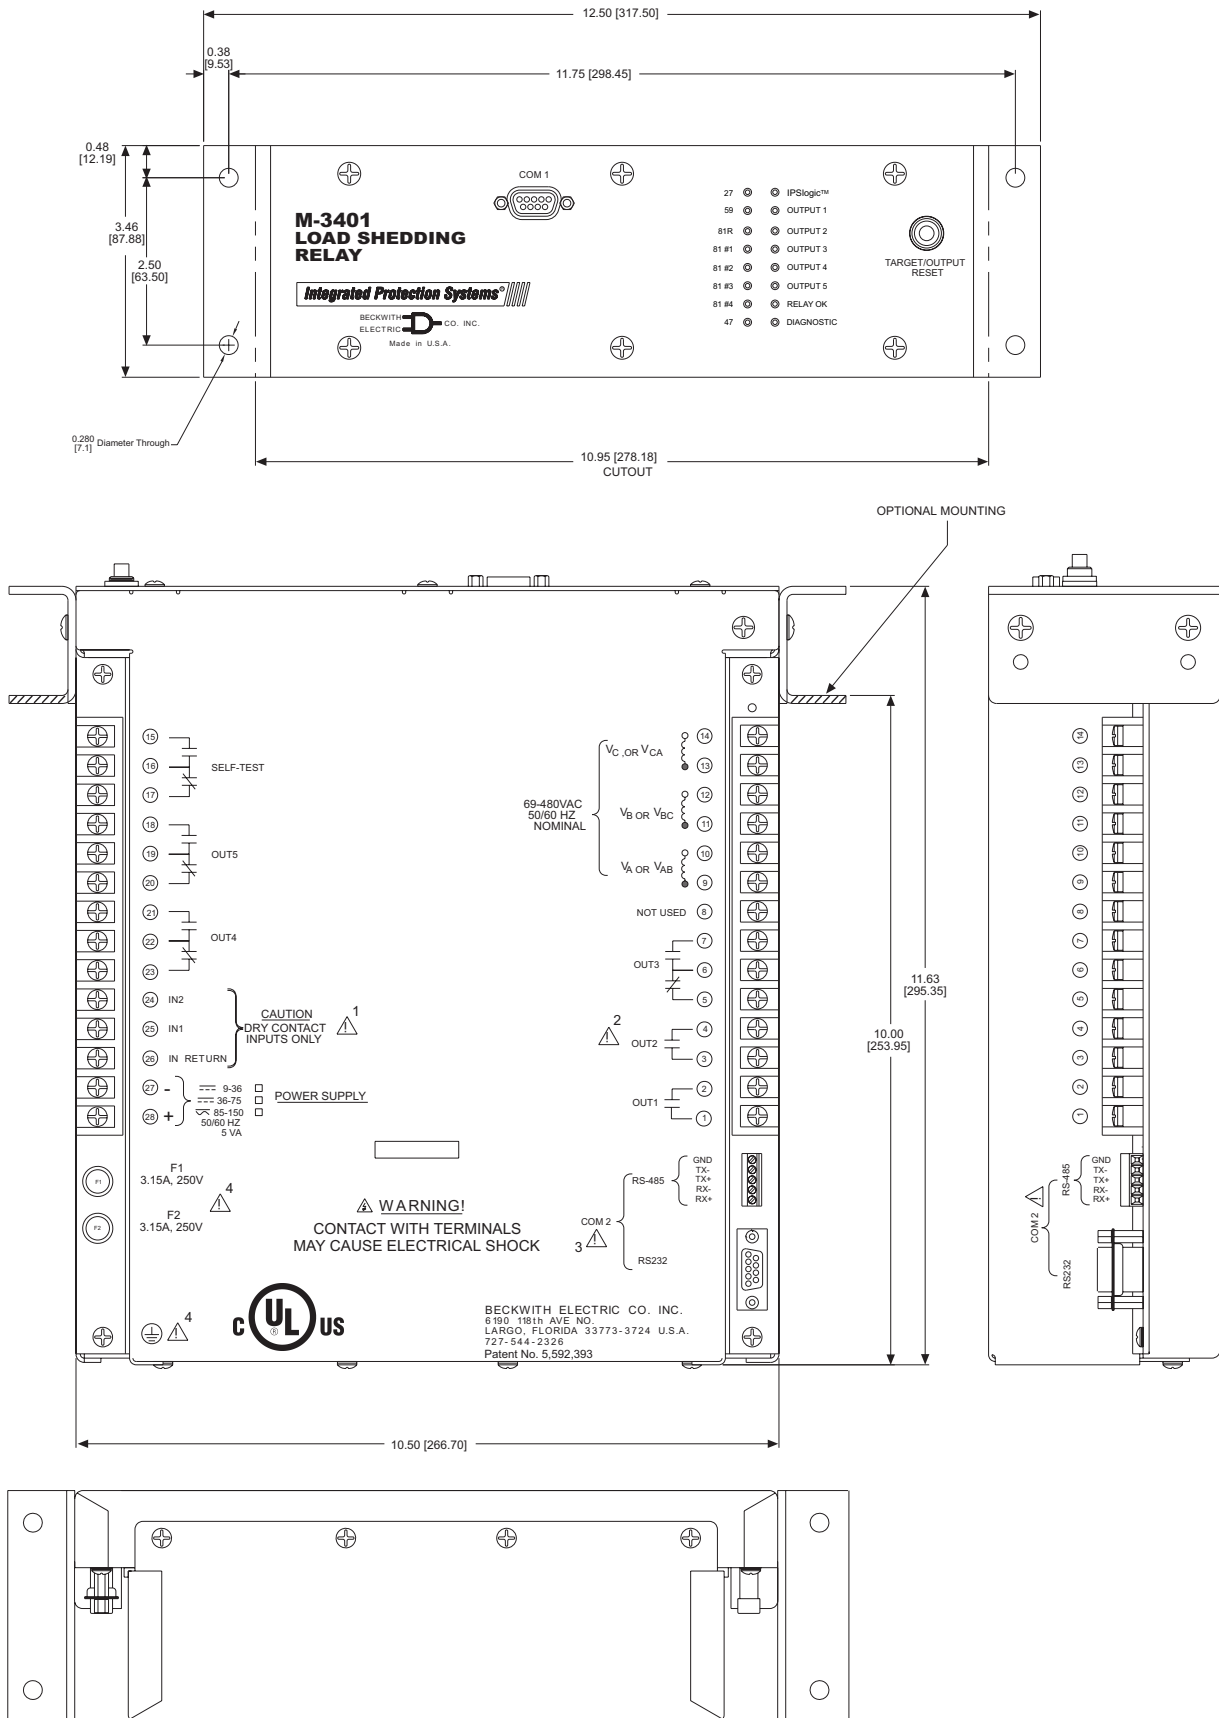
Optional Horizontal/Vertical Panel Mounting Dimensions
